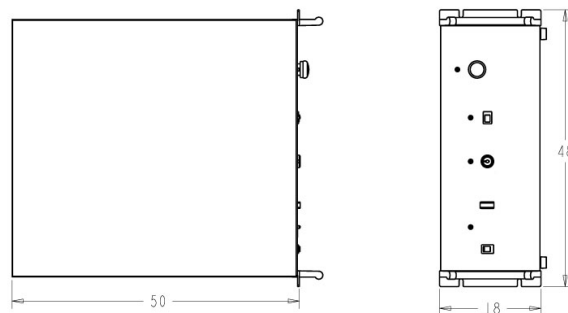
Dimensions of Cazadero Scientific FLCPA-05U controller
